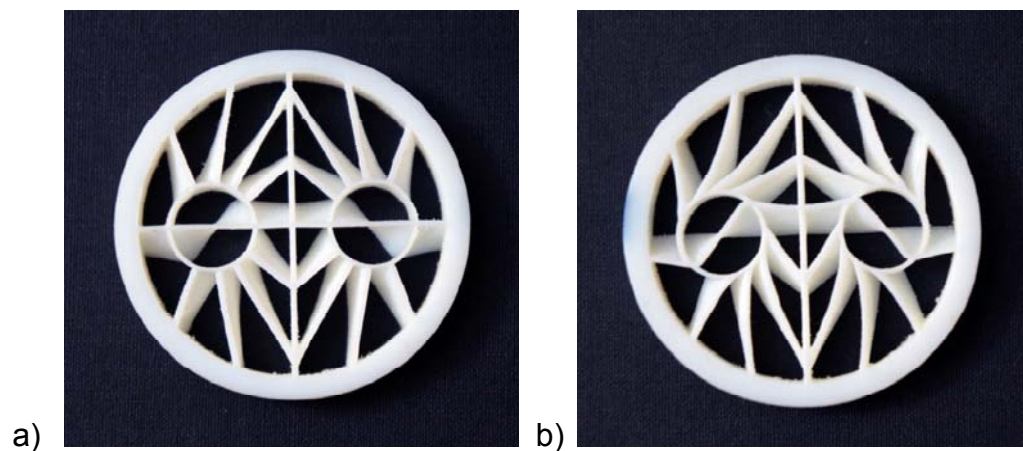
Model-1 a) Front view, b) Rear view. The outer diameter of this part is 55.88 mm (2.2 inches)
